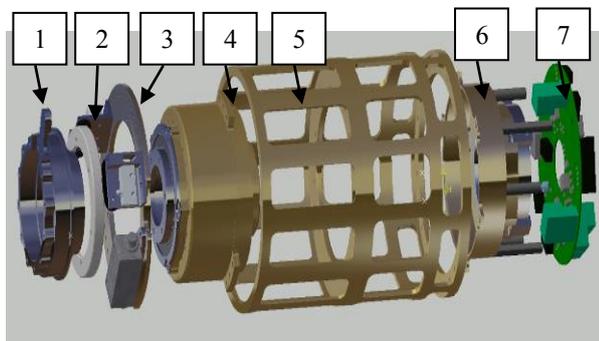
Joint decomposition. 1- output shaft, 2- absolute encoder, 3- end sensor assembly, 4- cycloid gear, 5- housing of the joint, 6- torque motor assembly, 7- control unit.
